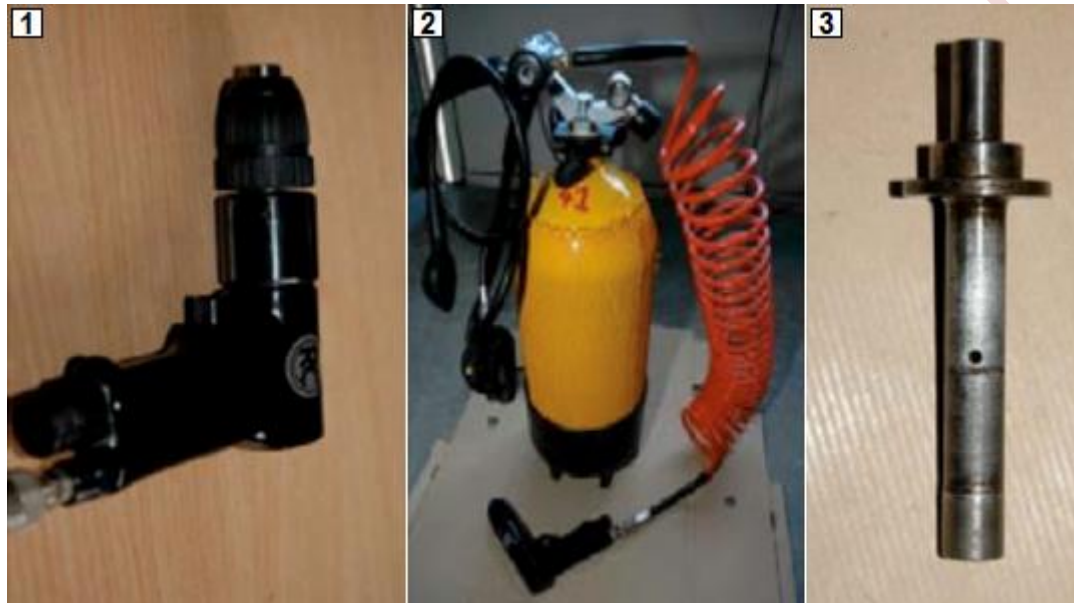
Rodcraft drill (1), drill connected to a tank of compressed air (2), diamonded drill bit (3)
